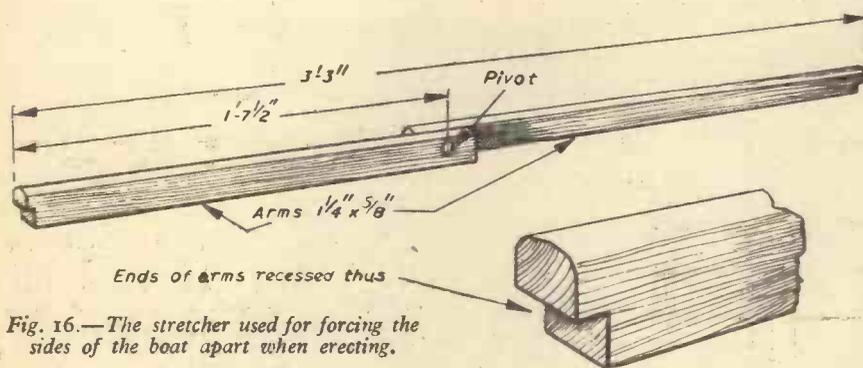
The stretcher used for forcing the sides of the boat apart when erecting.
